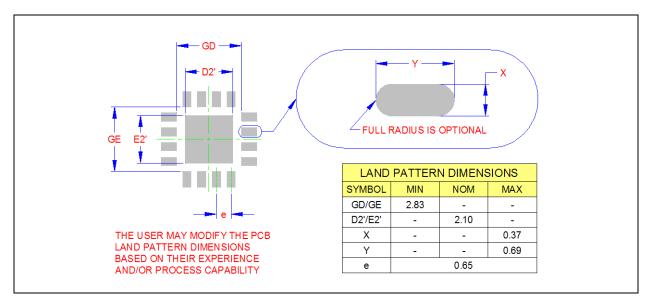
16-Pin QFN 4mm x 4mm PCB Footprint
